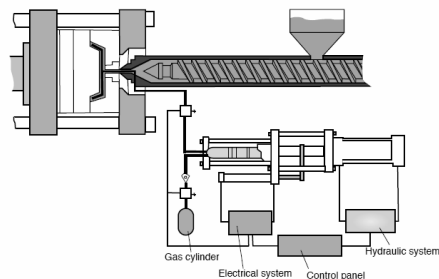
Schematic diagram of a typical injection molding machine adapted for gas-assisted injection molding with an add-on gas-compression cylinder and accessory equipment [3]
